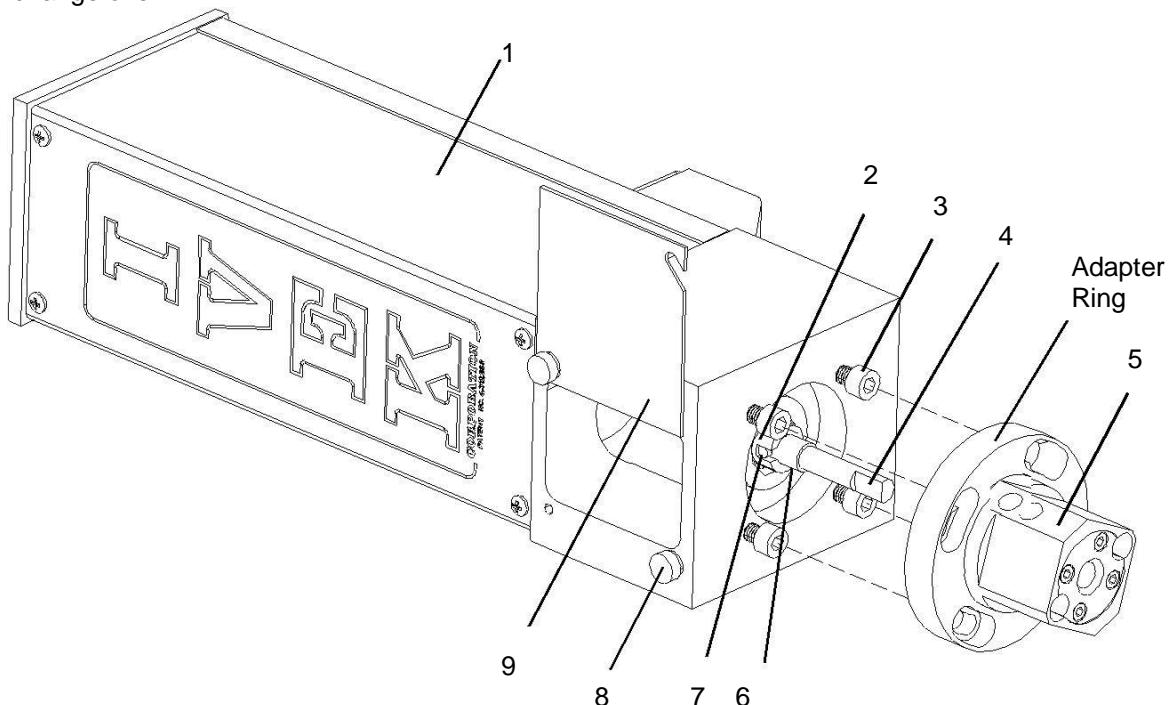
Micro Linear Pump Module Assembly/Disassembly
